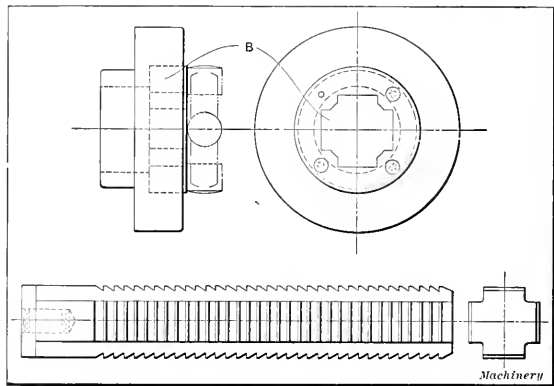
Broaching Fixture and One of the Broaches used for finishing the Inside of the Forgings
